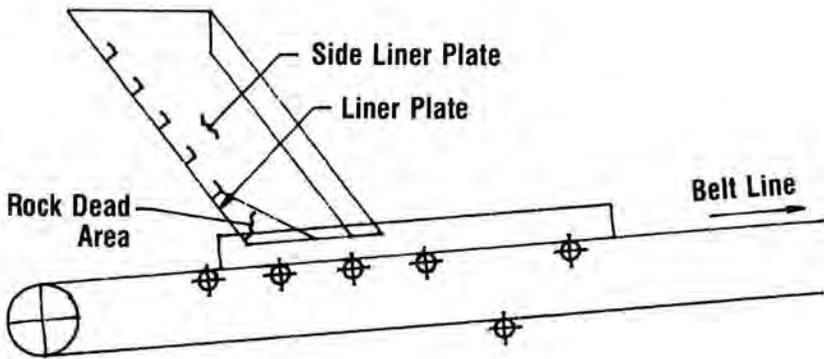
Loading chute with built-in stone box to minimize impact on conveyor belt and reduce wear on steel compartments.
